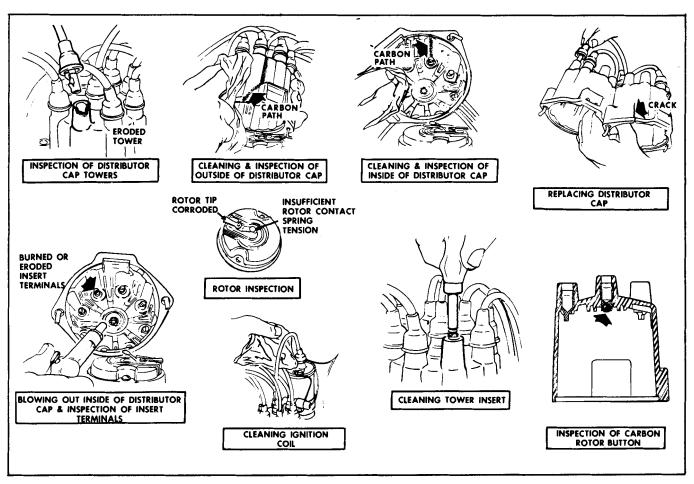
C-1 Inspecting Rotor and Distributor Cap
